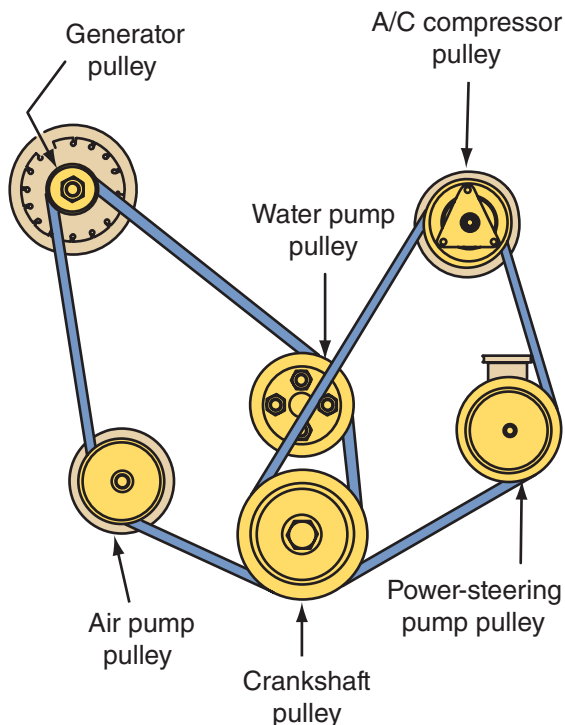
Before removing the drive belts, pay attention to the routing of each belt.
